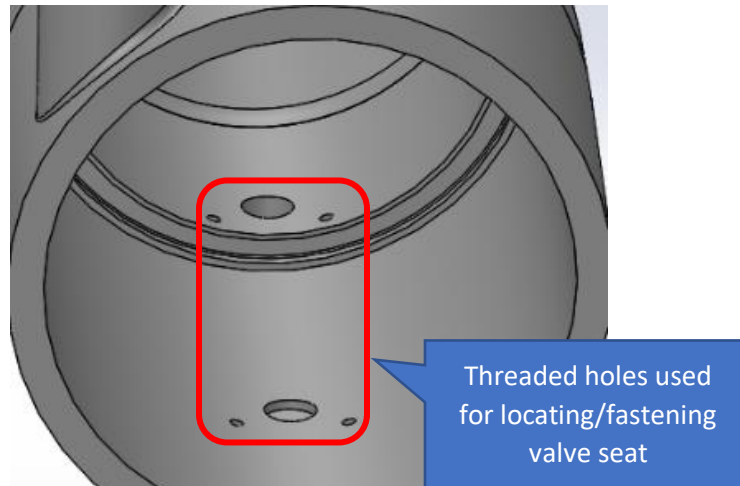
Close-Up Illustrating Threaded Pin Holes. Adapted from Figure 58.
